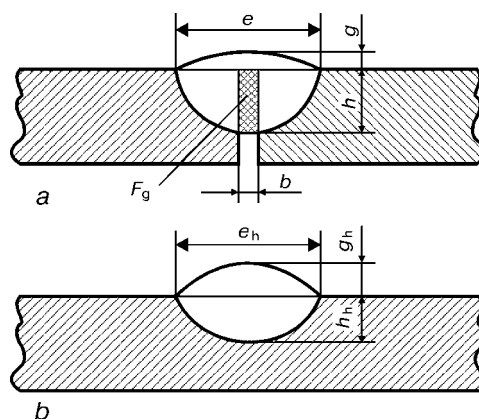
Sizes of butt weld (*a*) and deposited bead (*b*)
